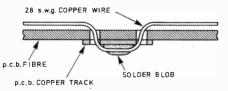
Cross section of solder joint and method of threading copper wire through Diode Gate p.c.b.s
